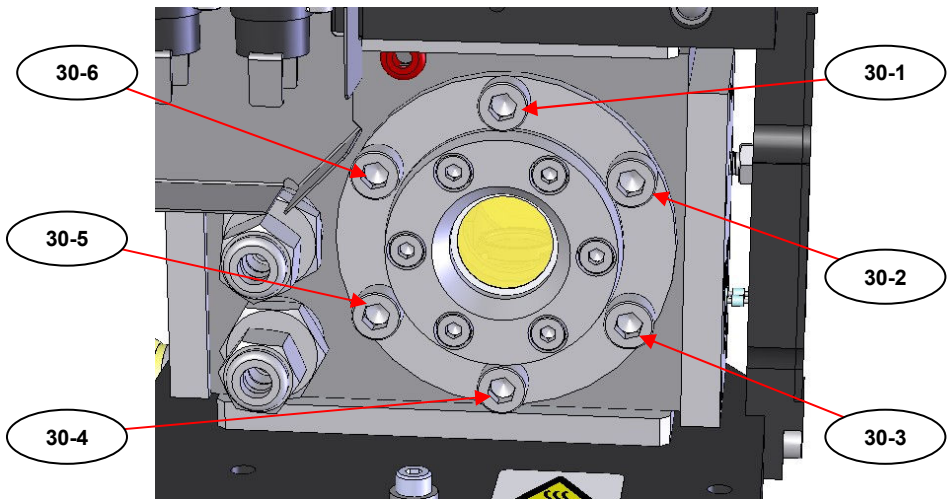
Window Assembly (11) Refitting Bolt Tightening Sequence
